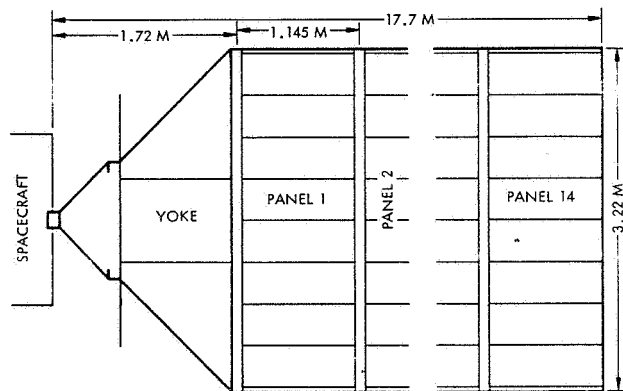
One Wing of ULP by MBB (Ref. 6.2-9)
